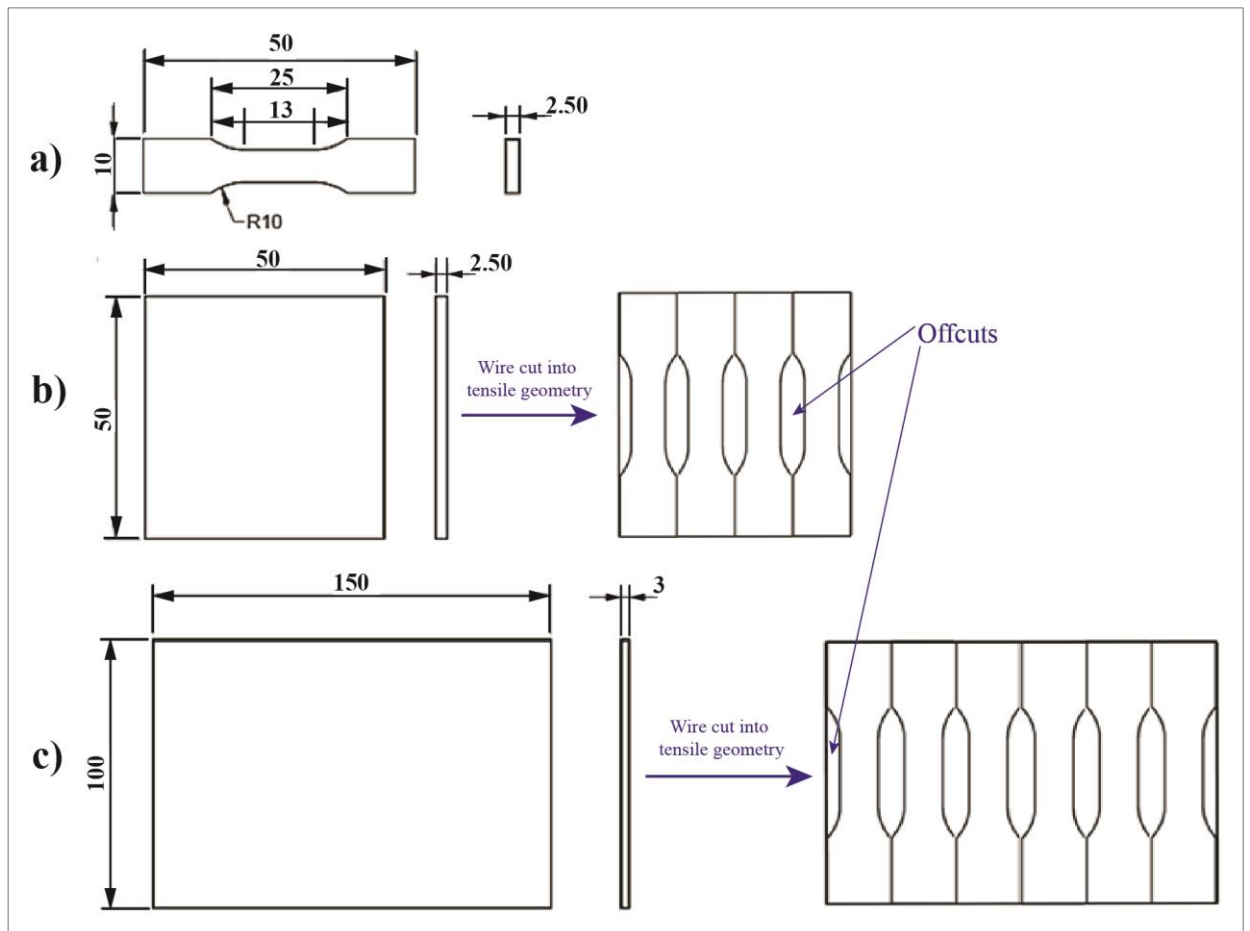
Dimensioned drawing (a) tensile specimen, (b) square specimen - only for Scalmaalloy to be additively manufactured for cold rolling, (c) extruded plates wire cut for cold rolling (units are in mm)
